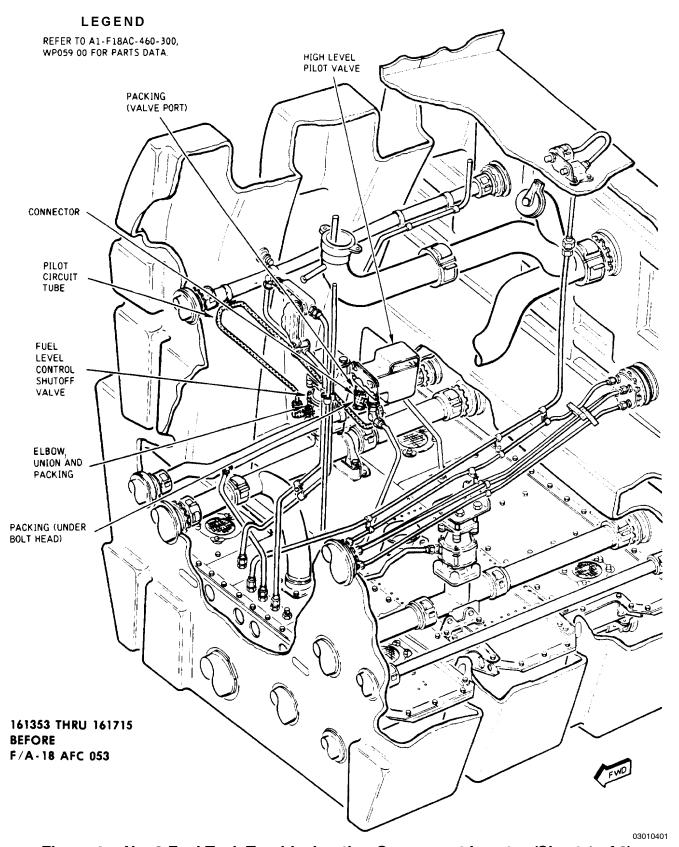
No. 3 Fuel Tank Troubleshooting Component Locator (Sheet 1 of 3)
